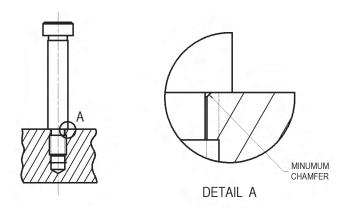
Shoulder portion of a shoulder bolt must sit flat on mounting surface.
